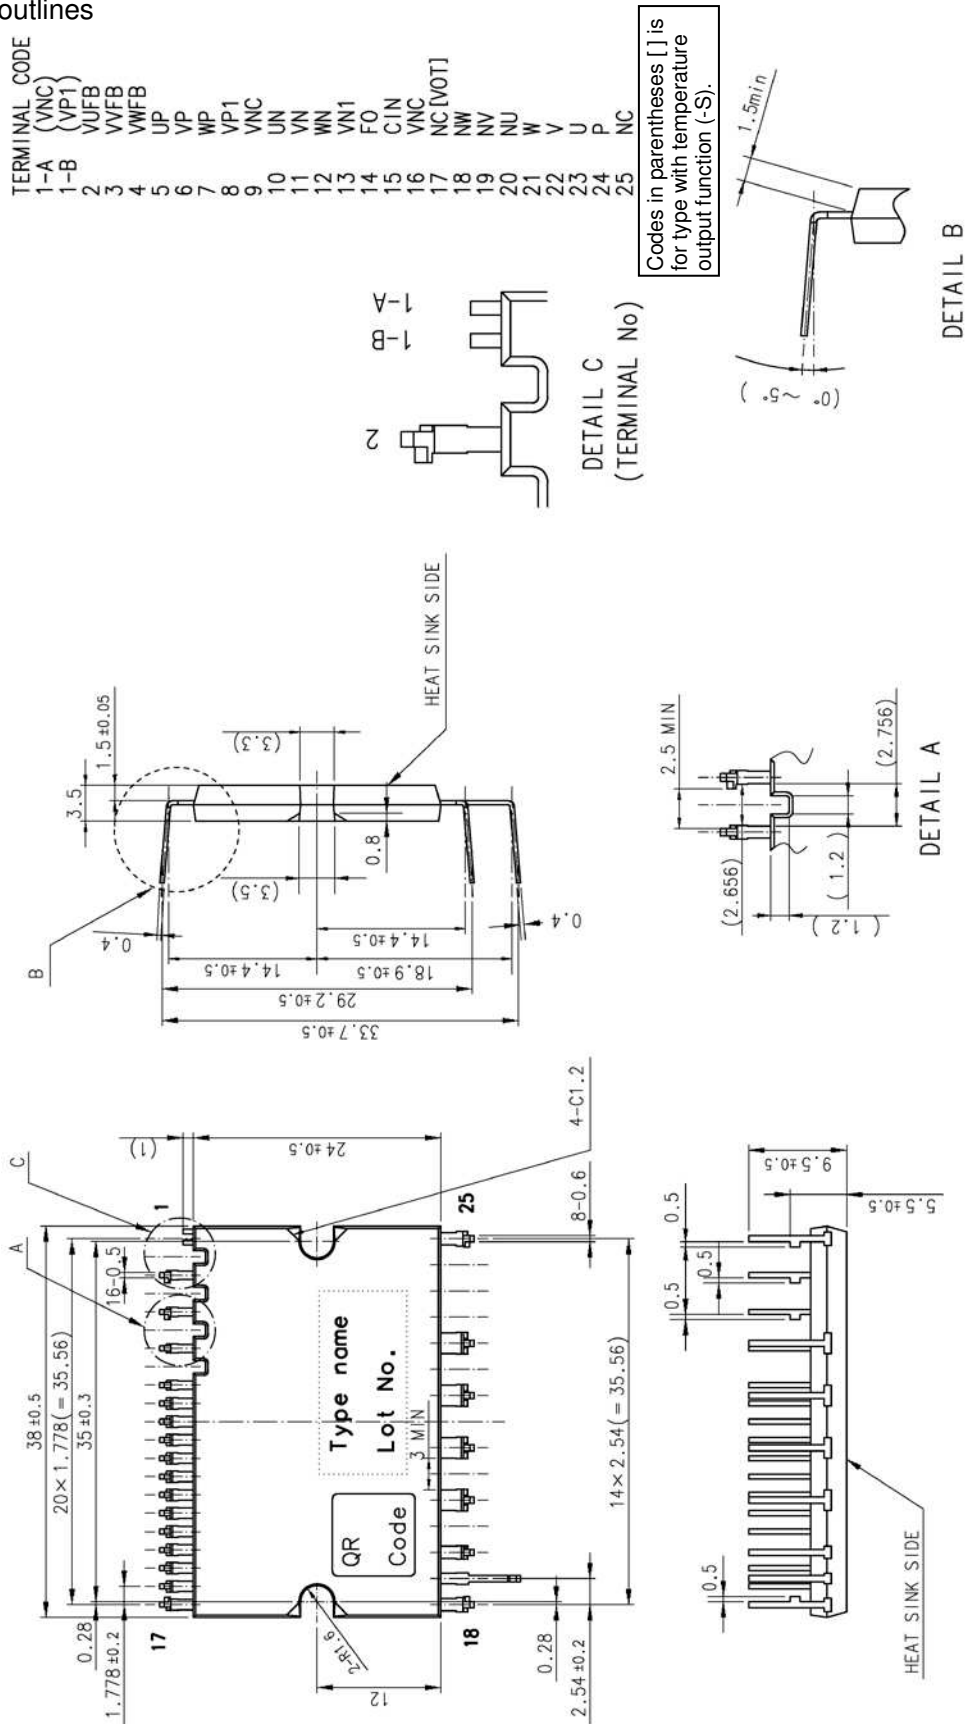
Short pin type package (-S/-ST) outline drawing
